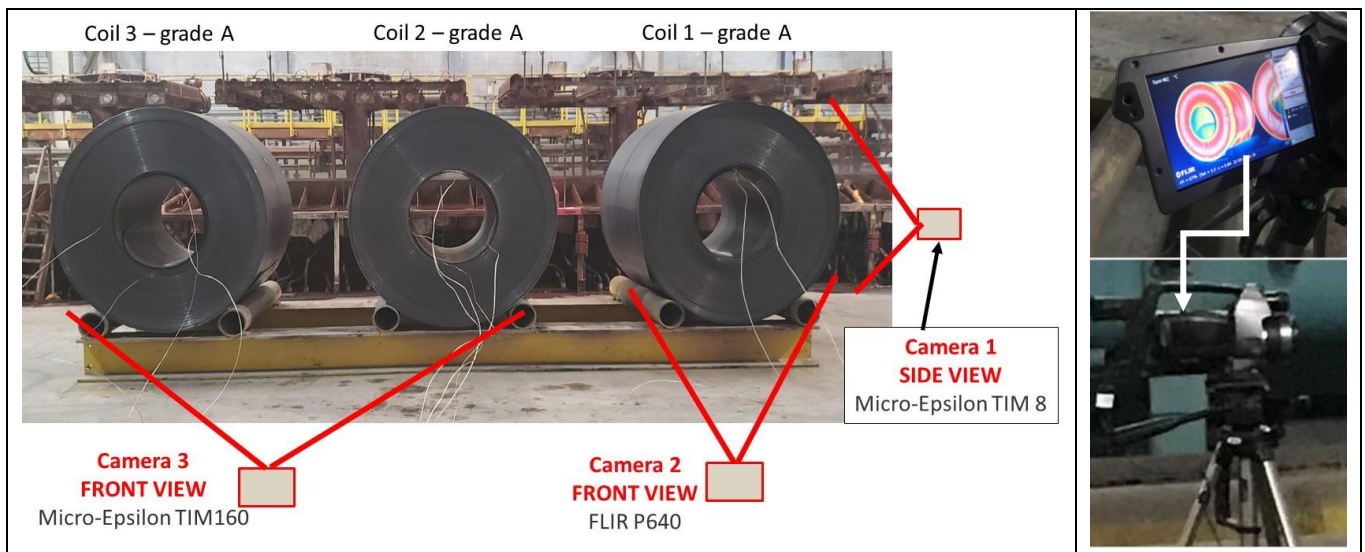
3 coils cooling trial at finishing mill exit, near the down-coiler and infrared cameras location. Coils dimensions (thickness (mm) x width (mm) x length (meter): coil1: 2.92x1181x642 - coil2: 2.98x1163x636 coil3: 2.98x1169x635
